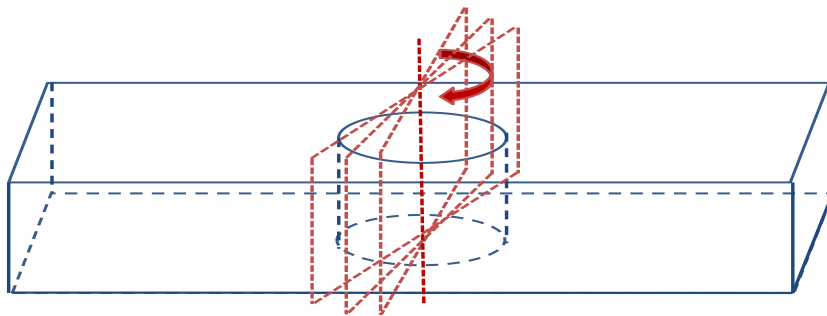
Inspection of a hole by the use of sweeping a sectioning plane around it and creating a movie.
